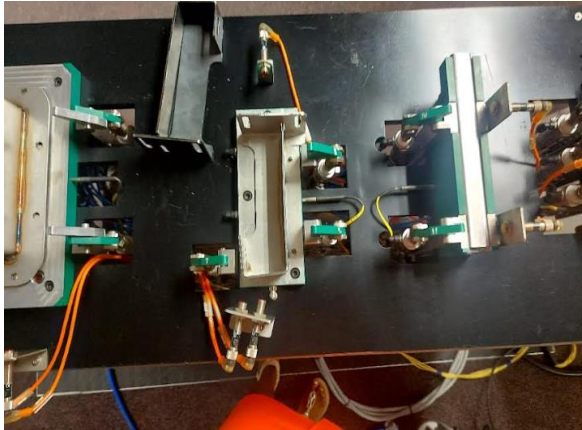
THE DEVELOPED WELDING FIXTURE
